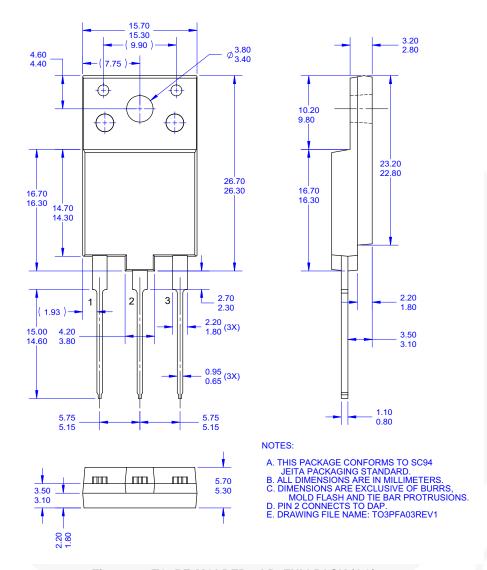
TO3PF, MOLDED, 3LD, FULLPACK (AG)
